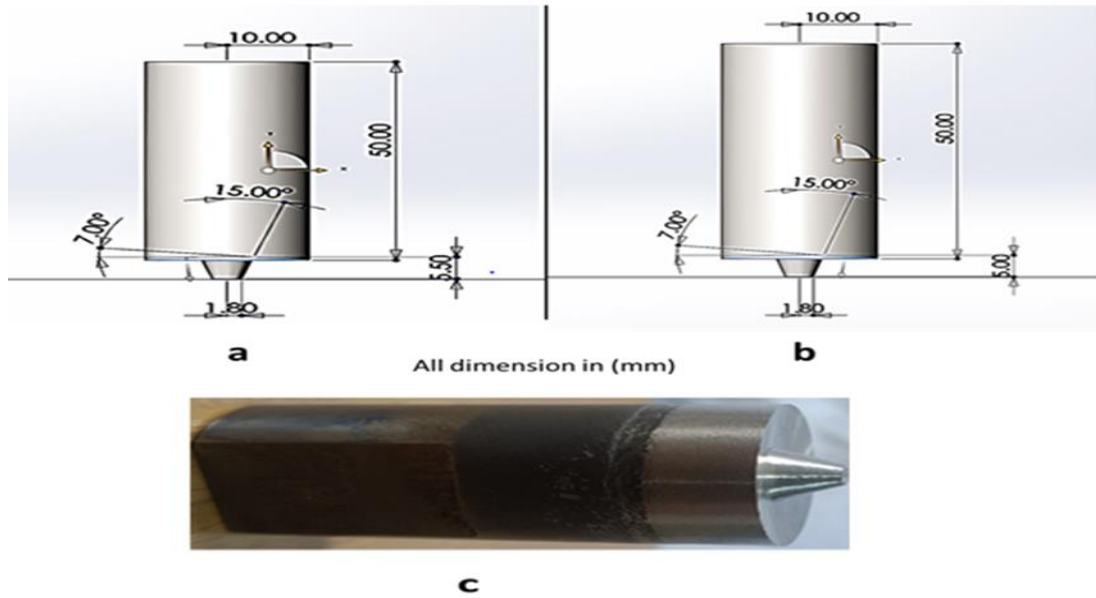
schematic drawing of tool design a) short pin length 5 mm and b) long pin length 5.5 mm, c) designed tool
